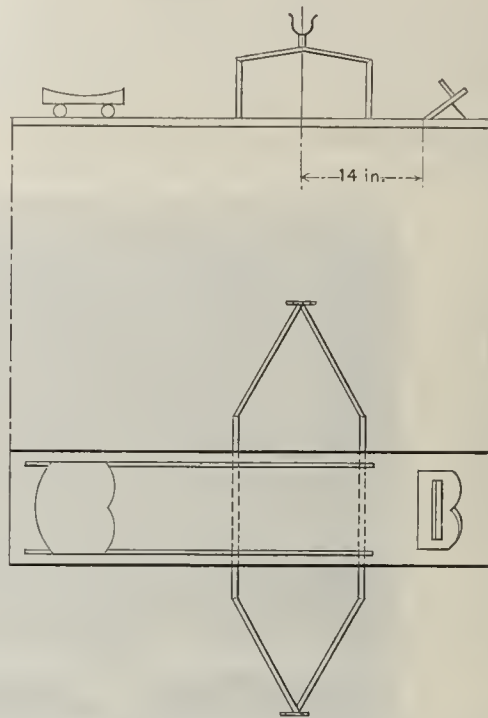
Plan and Side Elevation of Seat and Outriggers.
